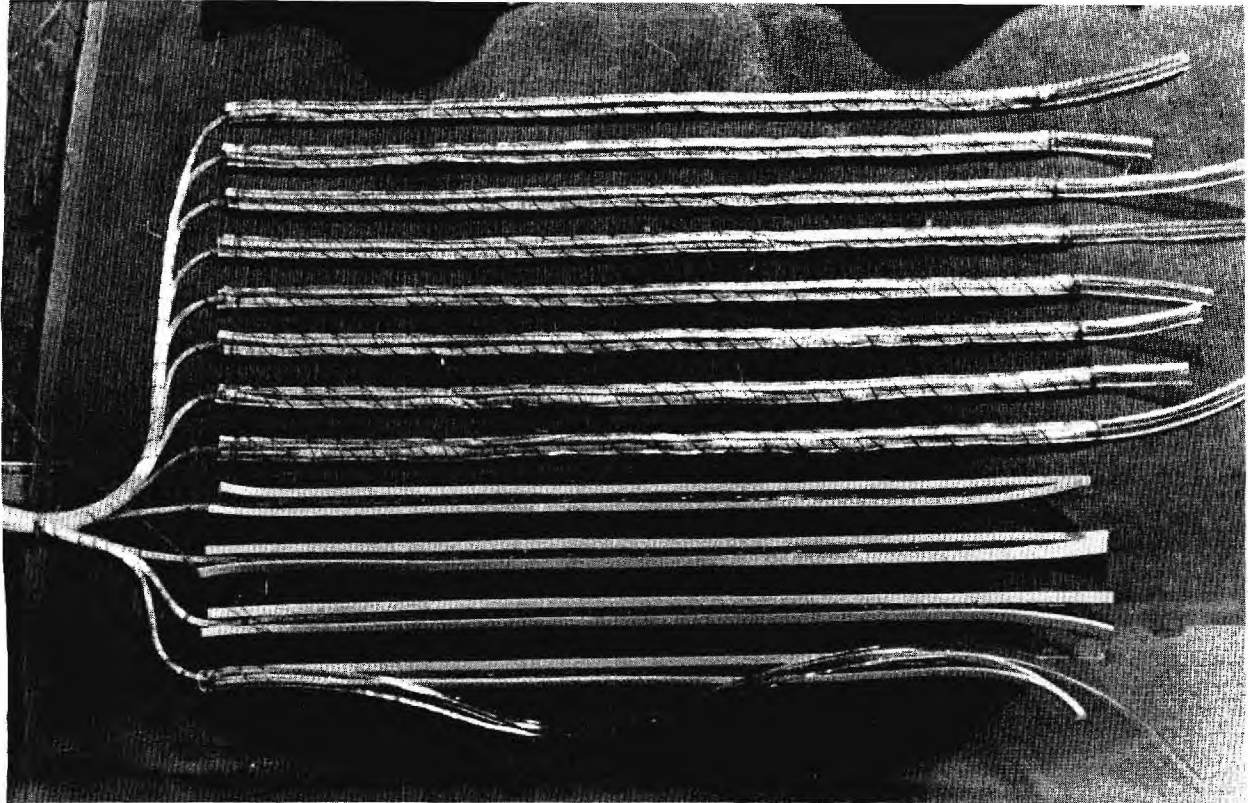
A Photograph Showing the Fabrication Technique Employed on Test Panel B.
